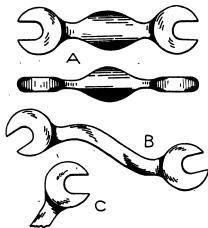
METHOD OF MAKING WRENCHES FOR LOCOMOTIVE WORK.
